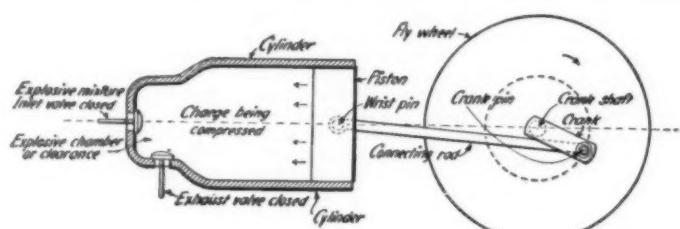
DIAGRAM SHOWING MECHANISM OF INTERNAL COMBUSTION ENGINE—COMPRESSION STROKE.
